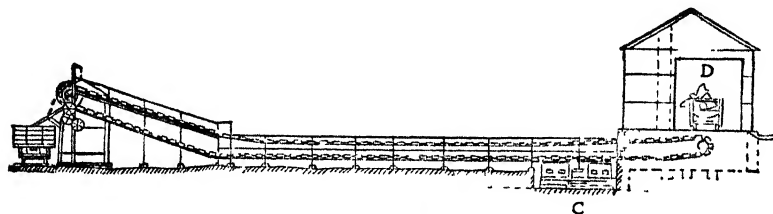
Heyl and Patterson pig-casting machine.
